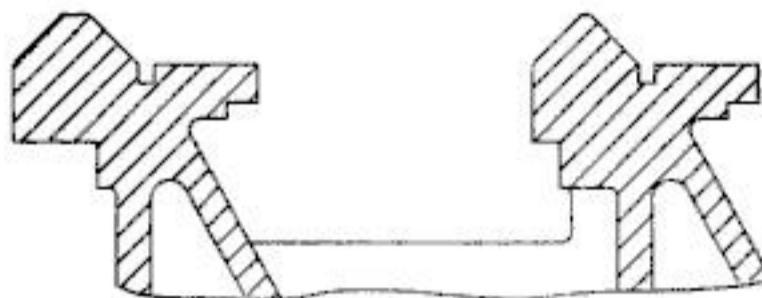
Asymmetric V slideway used in machine tool bed.
